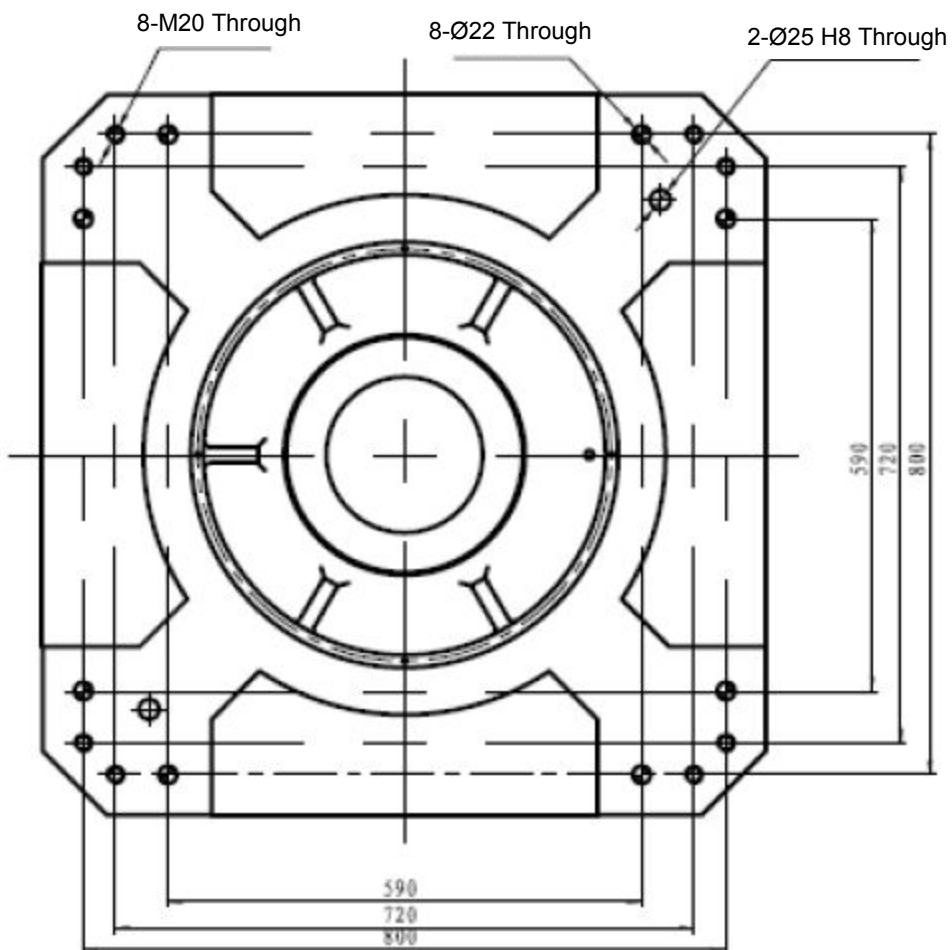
Base Mounting Hole Dimensions of SP200/ SP275
